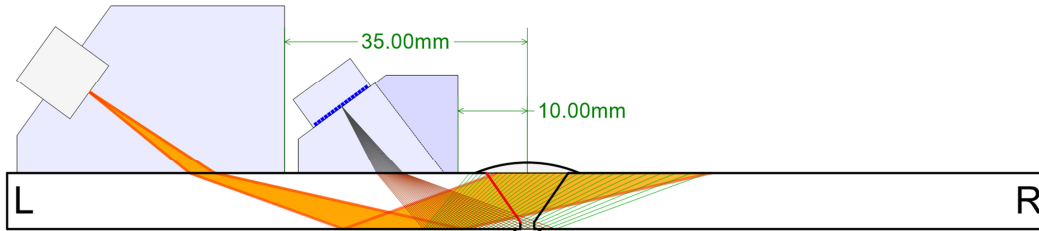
The lack of side-wall fusion on the left side of welded joint L (A)
